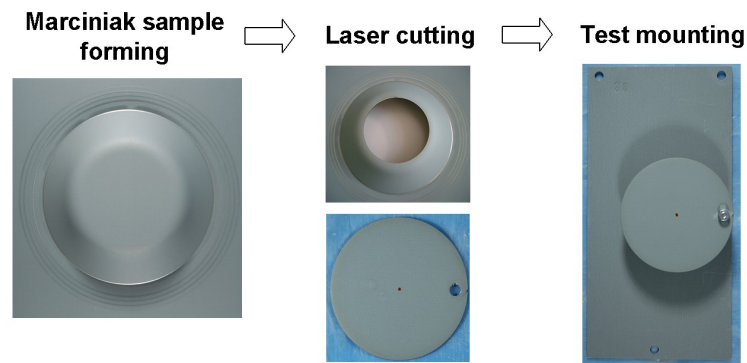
Sample mounting for corrosion testing of formed corrosion protection primers
